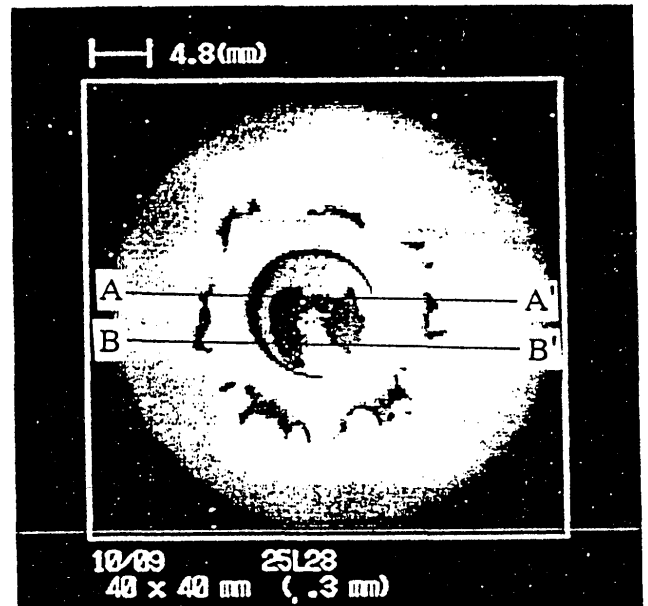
Ultrasonic image of Al/Cu joint welded at 333 m/s.
